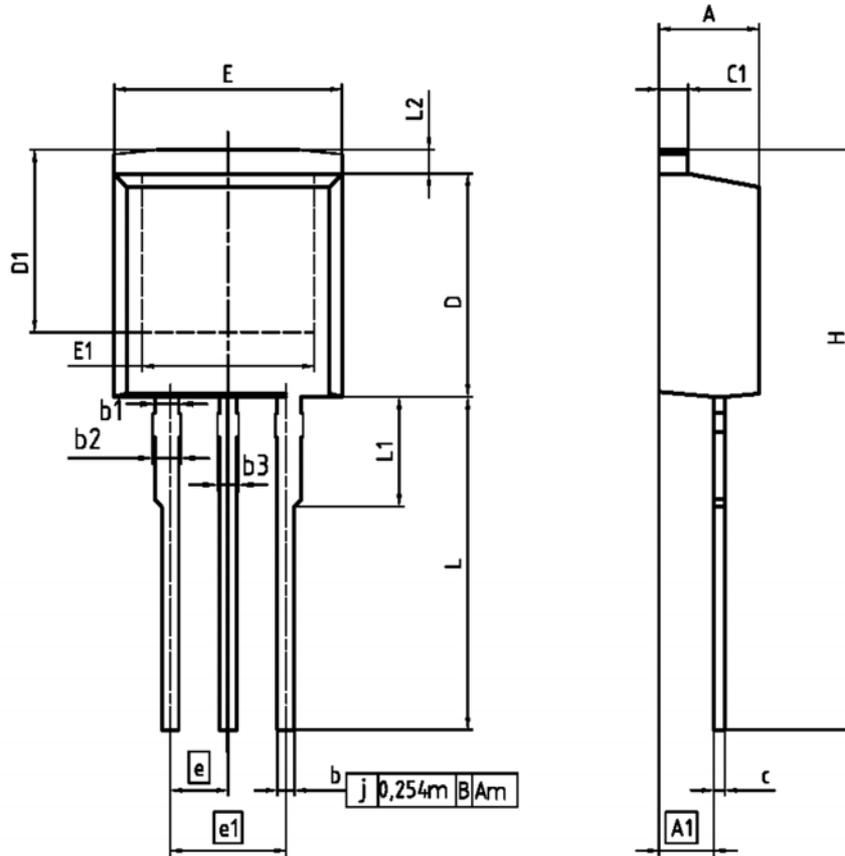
Outline PG-TO-220 FullPAK dimensions in mm
